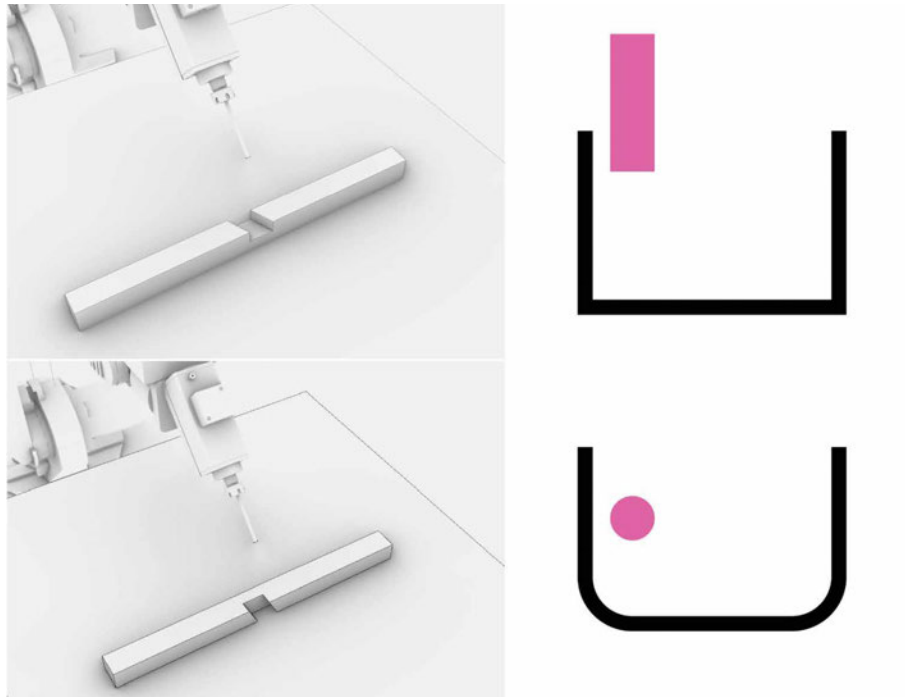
Two methods of toolpath generation for material removal: Layer by Layer removal on the top and perimeter removal without crushing the material in the middle and bottom.
